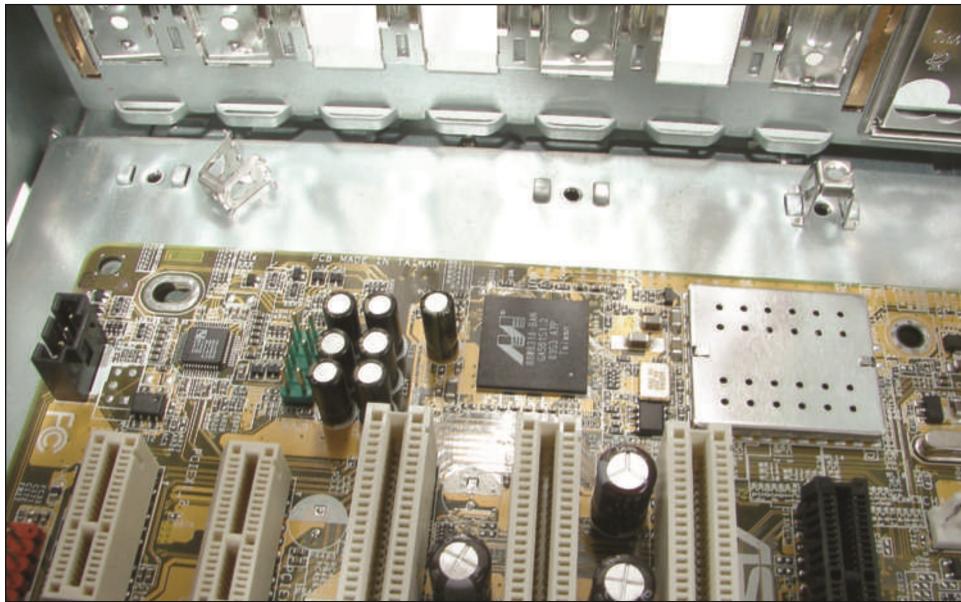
This motherboard connects to a case using screws and spacers that keep the board from touching the case
